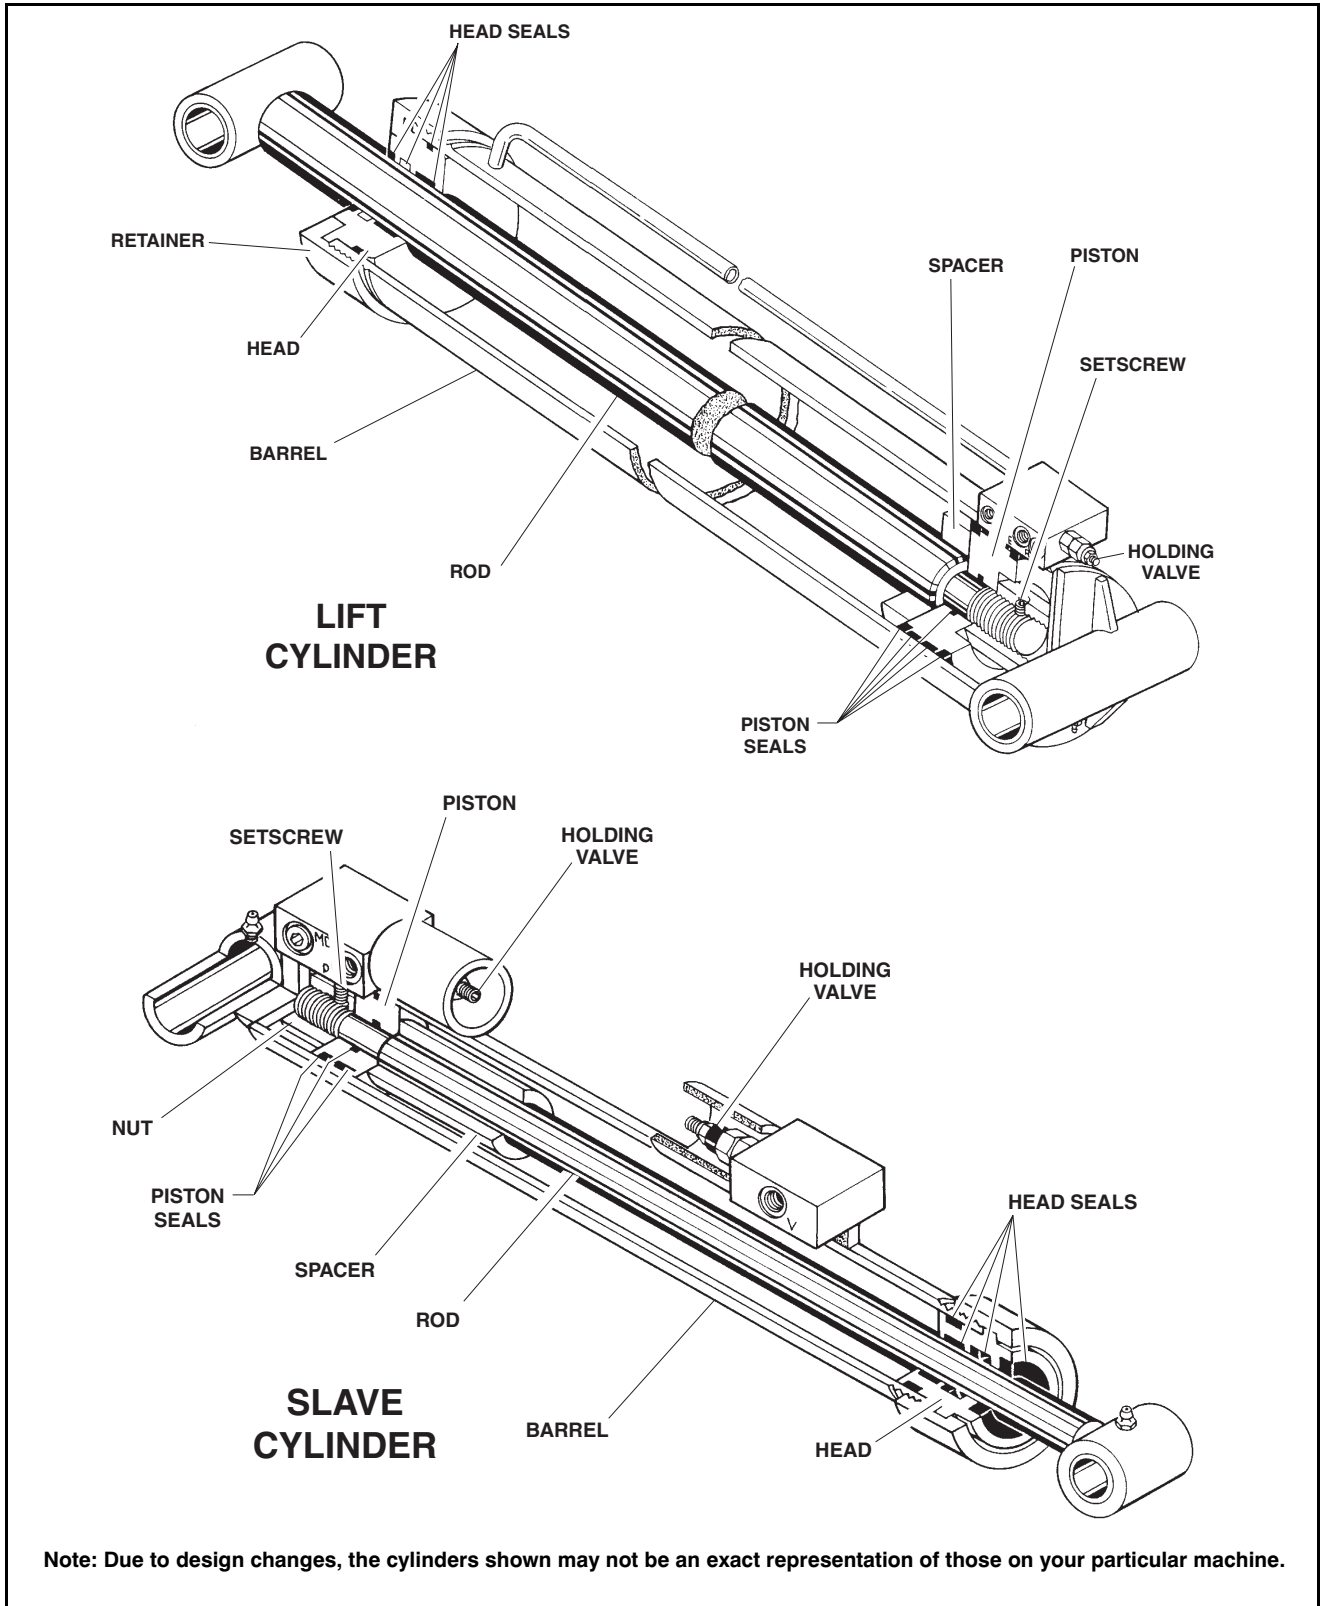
Typical Hydraulic Cylinders -Sheet 2 of 5
